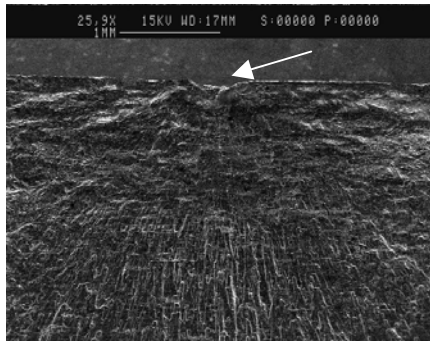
Fatigue fracture surface of typical machined + 100hr salt fog exposure sample. Arrow indicates fatigue origin at the site of corrosion pit.
